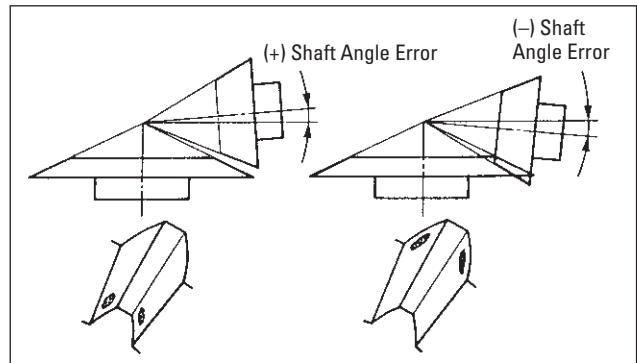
Poor Contact Due to Shaft Angle Error
